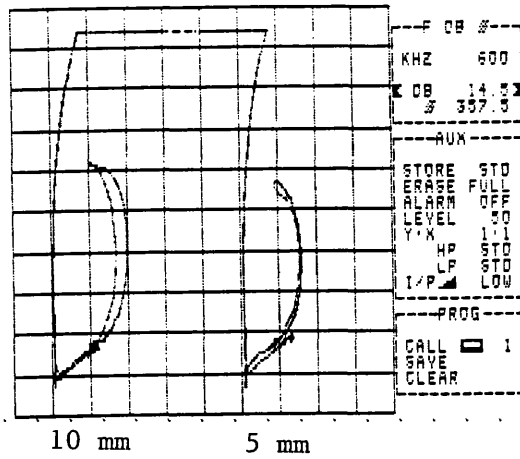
Absolute Pencil Probe Traces for 5 mm and 10 mm Deep Slots in Stainless Steel Weld Specimen 1
